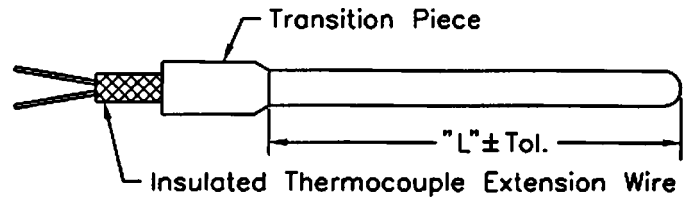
Sheathed Thermocouple Assembly with Transition Piece
